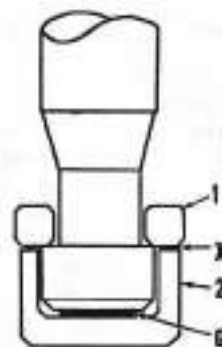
Feeler gauge method of checking rotor cap clearance between cap and end of stem; refer to text. Use of special micrometer gage is preferred.
